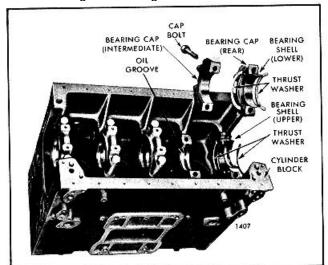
Main Bearing Shells, Bearing Caps and Crankshaft Thrust Washers
